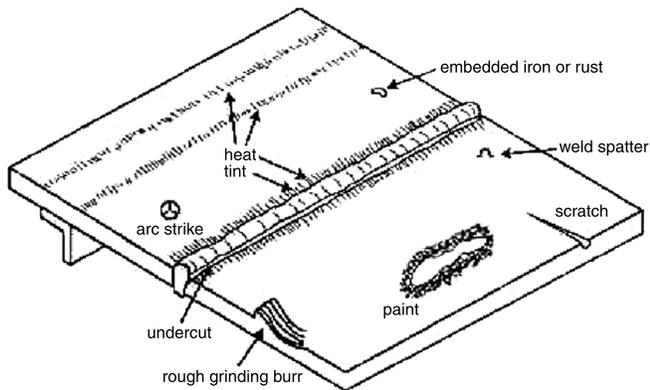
Potential surface defects in stainless steel fabrications.
